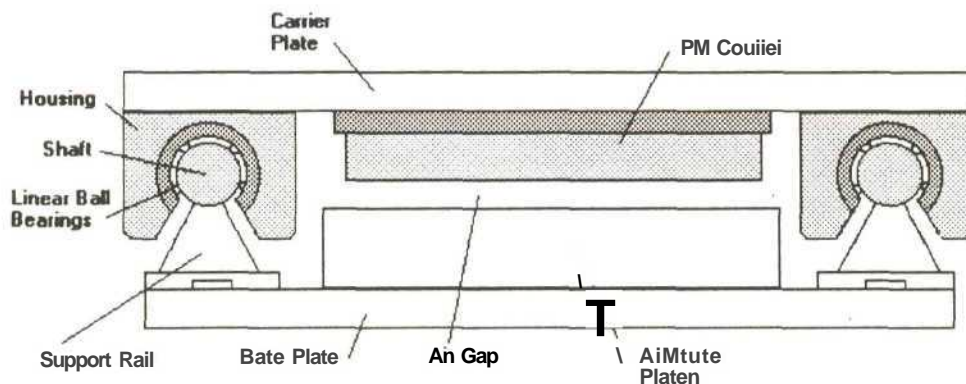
Mechanical bearing system proposal using shaft guided linear ball bearings
